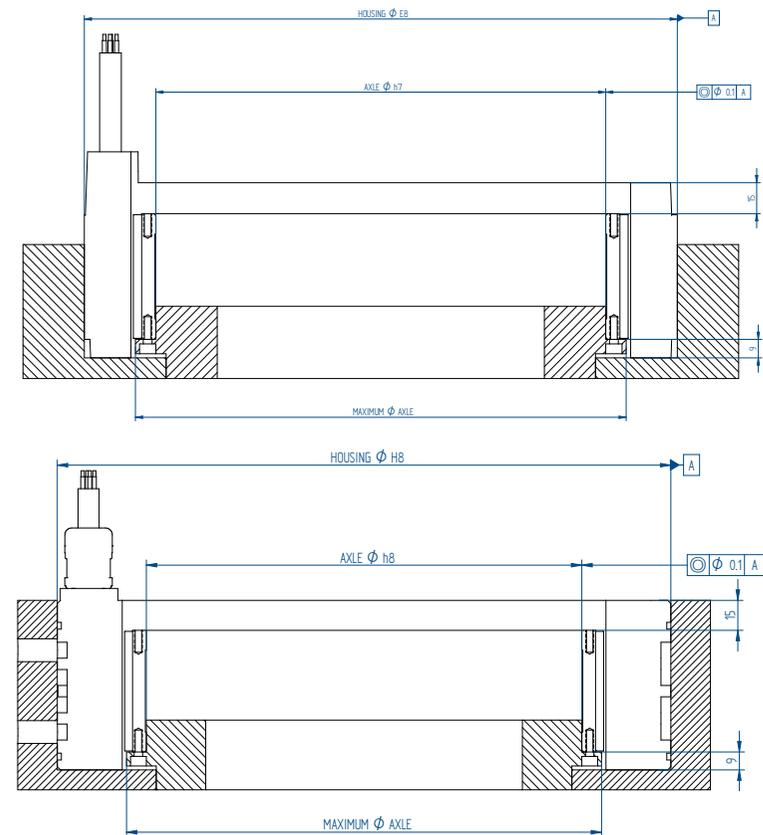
QTL 210 and 290 (above) QTL 230, 310, 385 and 485 (below) housing requirement tolerances for mounting/centering purposes
